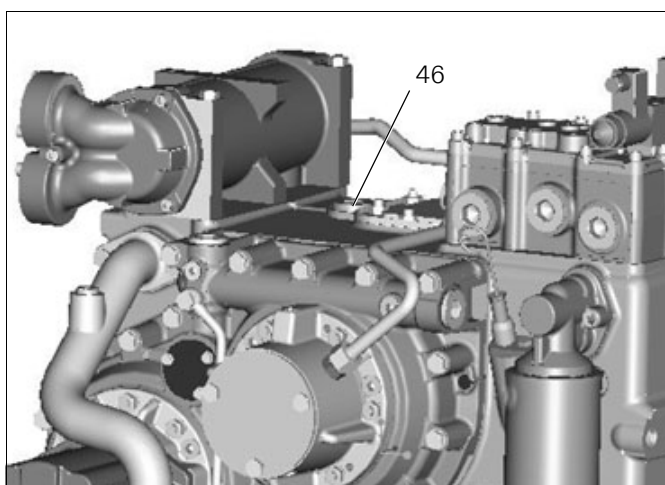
Oil filler screw (46) on transmission ZF 2000 (example)
